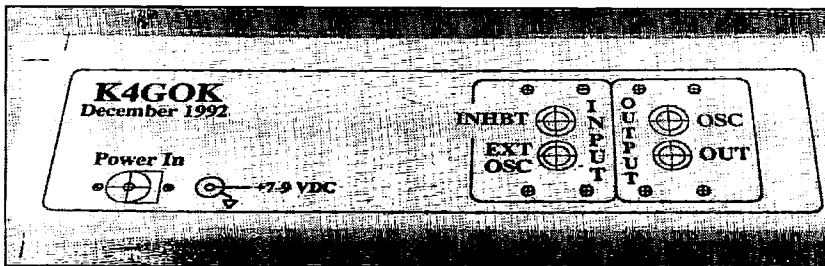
Photo E. A painted panel with the film in place, ready for cutting to shape and drilling.
